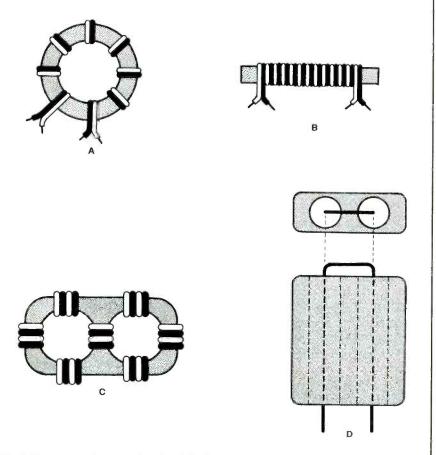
Shown here are construction details for the most common types of transformers: toroid (A), solenoid (B), bazooka—end view (C), and bazooka—top view (D).
